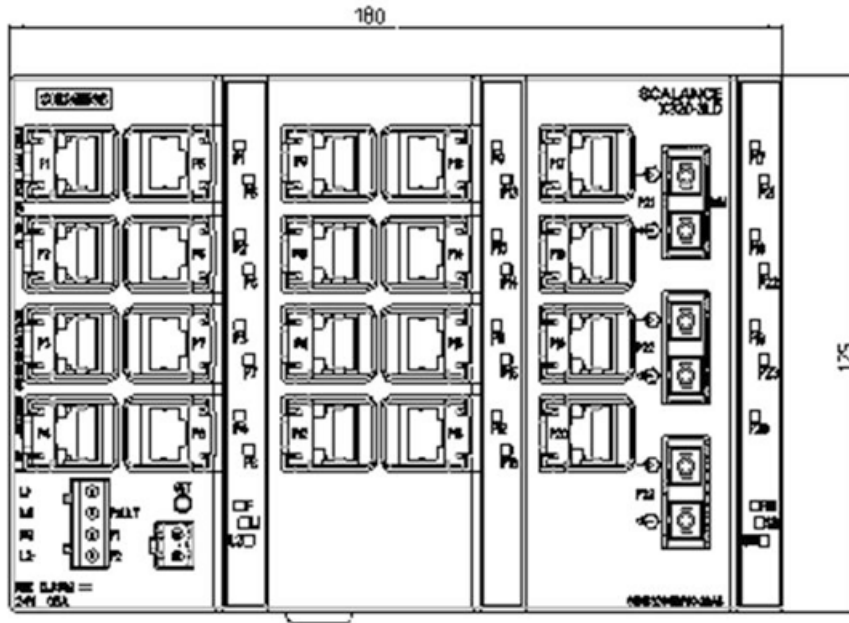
Large design dimension drawing Part 1 (example used here SCALANCE X320-3LD FE)
